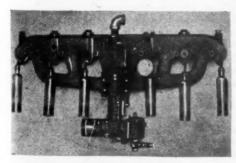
An improved type of manifold in which the admission pipe is cast integrally over the exhaust pipe, thus securing better vaporizing of the heavy ends
